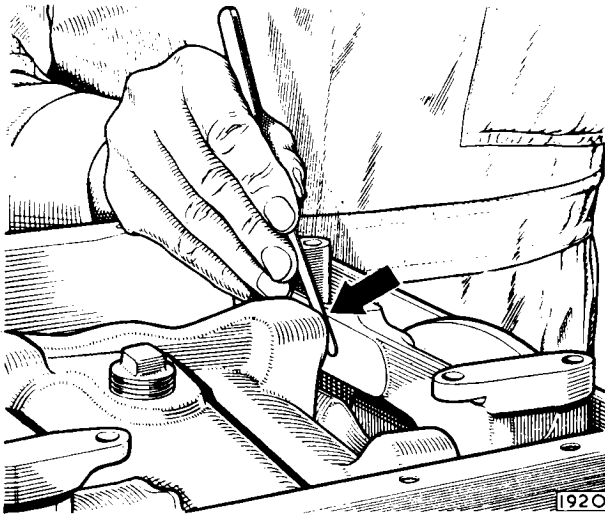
Measuring the clearance between the inner fulcrum mounting bracket and the differential casing
